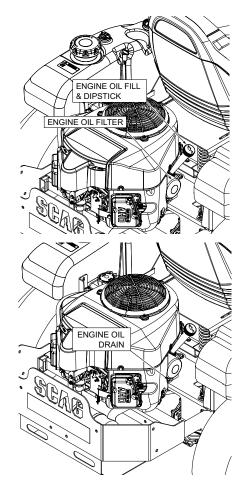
Oil Fill / Dipstick, Oil Filter, Oil Drain
